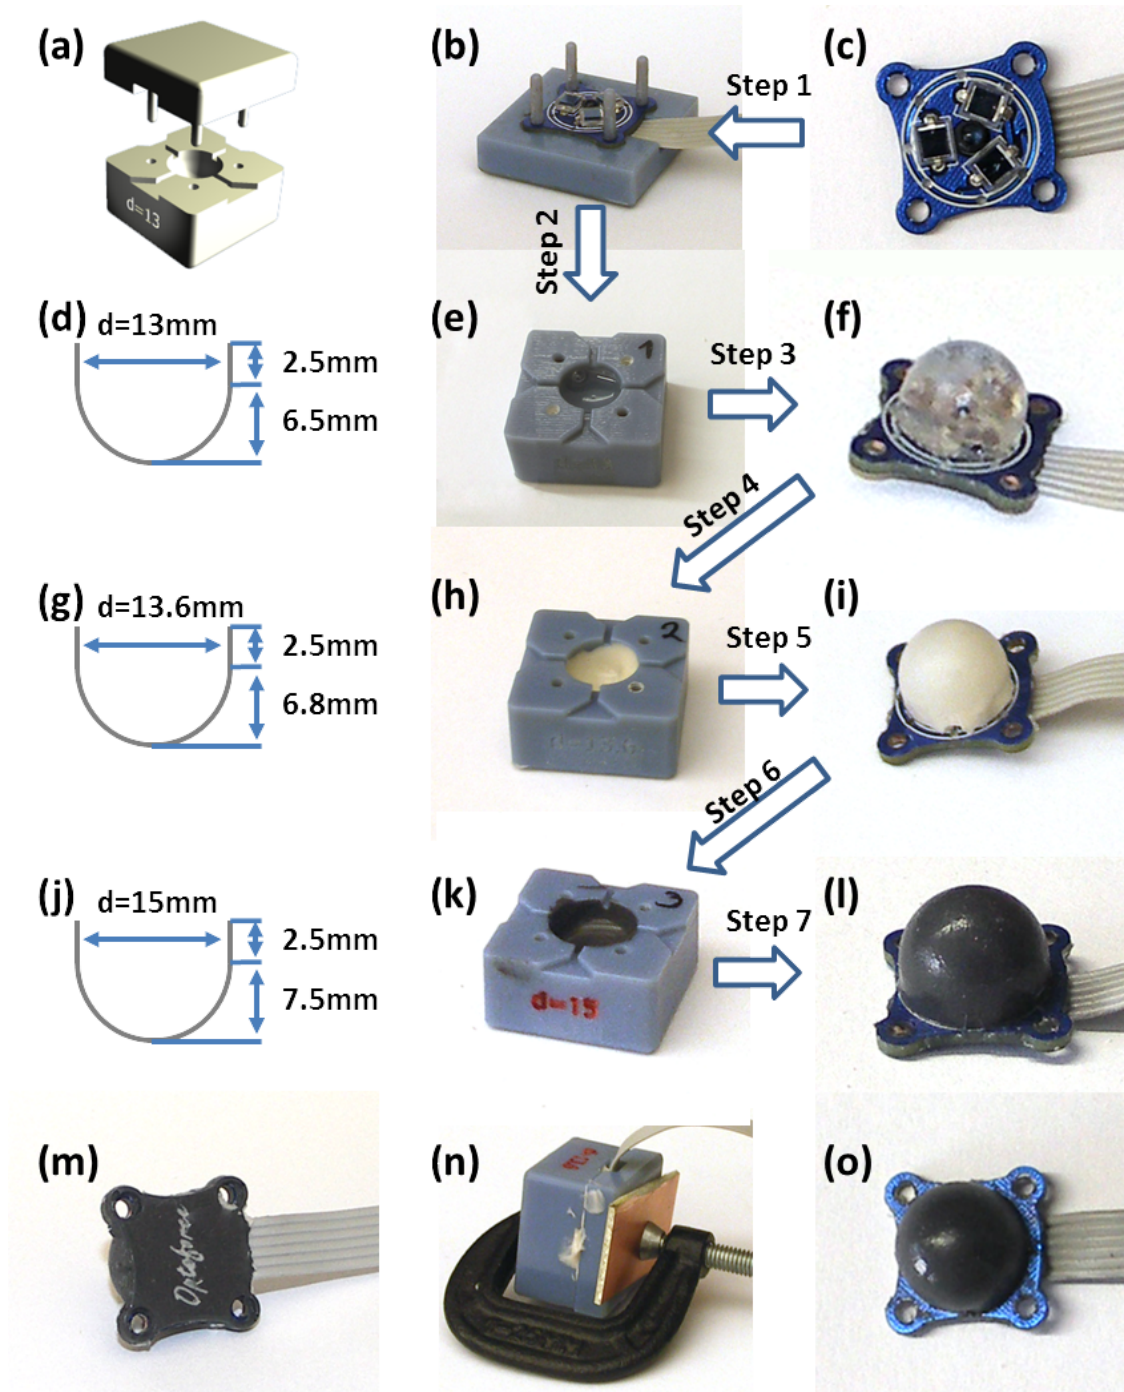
The moulding process of the elastic cover. (a) shows the moulding form 3D design, (b) is the top form that keeps the sensor board (c) in place. Each layer has its separate moulding form (e - inner transparent layer, h - middle reflective layer, k - outer optical blocking layer) with different mechanical properties (d,g,j). Each moulding step output is shown in (f,i,l). In the final step a 1 mm thick silicone layer is added to the sensor board bottom to prevent the incoming light.
